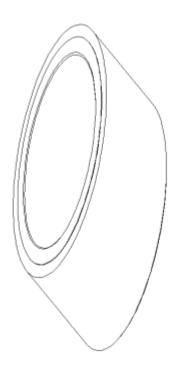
REAR MAIN SEAL DRIVER 9706 Courtesy of CHRYSLER LLC
